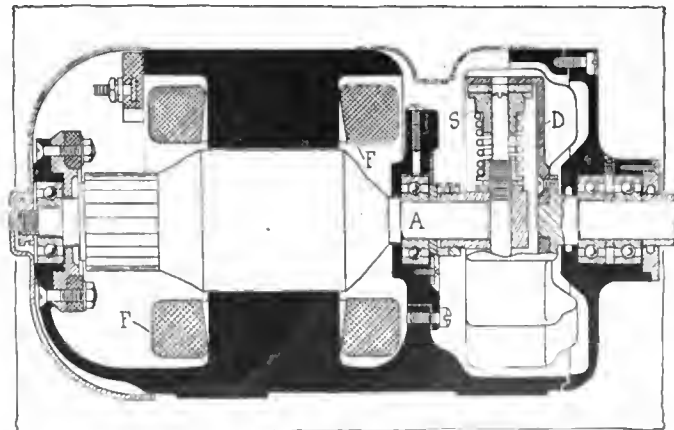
Sectional view of Gray & Davis dynamo. This view shows the regulator illustrated in Fig. 2, mounted in the right end of generator casing
